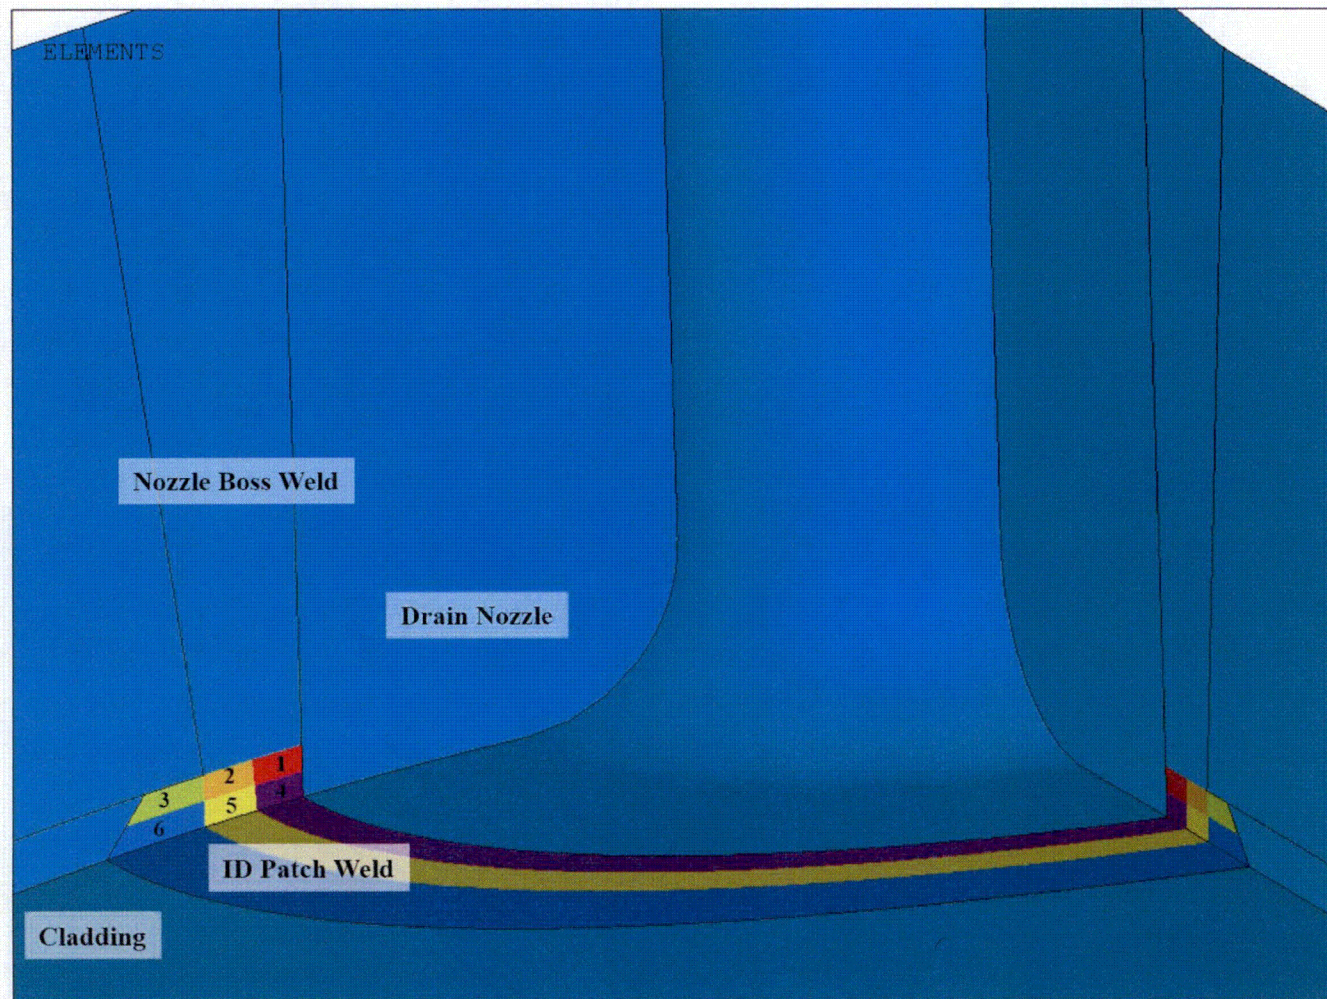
Weld Nugget Definitions for the Hot Leg Drain Nozzle ID Patch Weld
